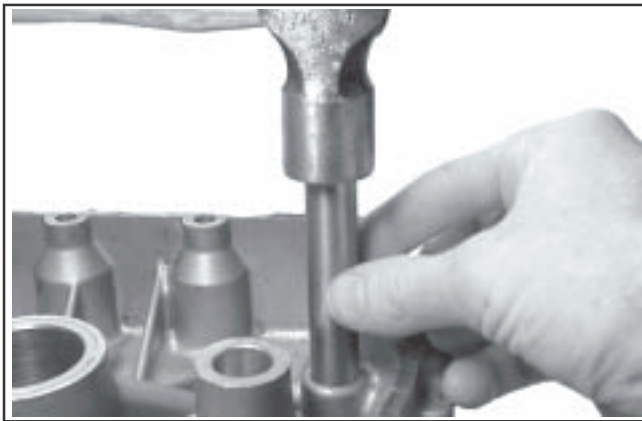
Inserting New Relief Valve into Bore of Closure Plate.
